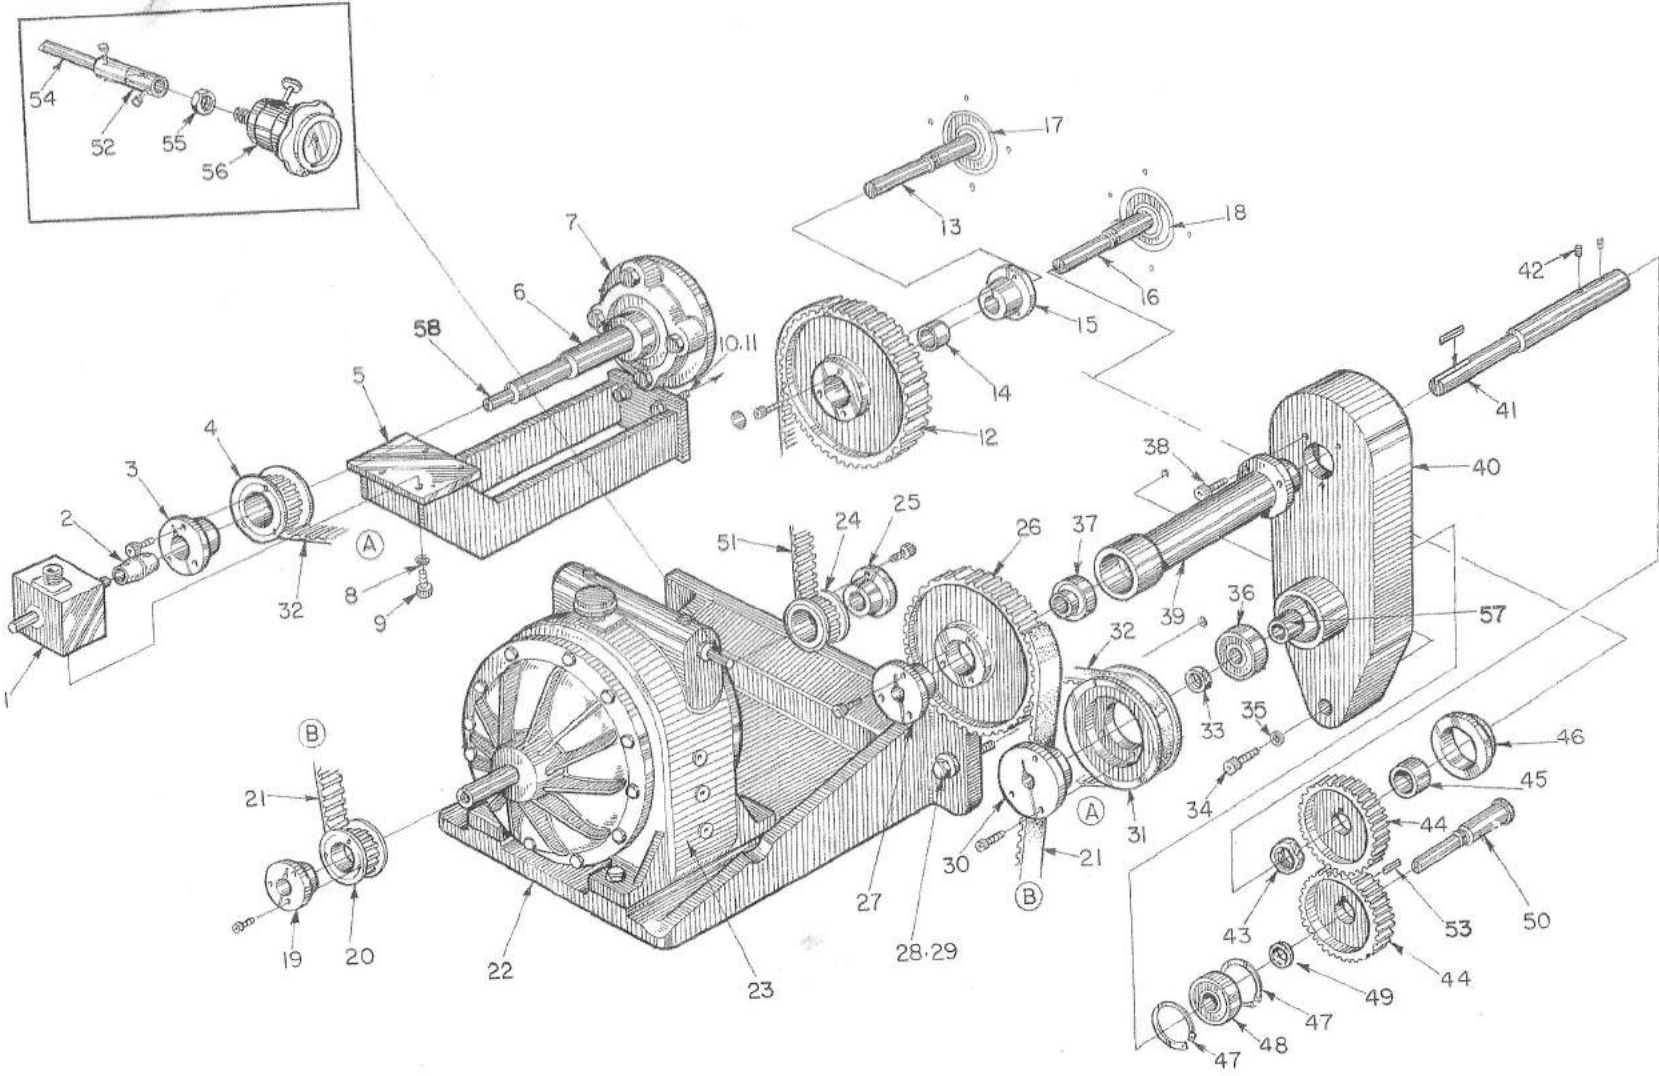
Drive Assembly LS - Nip Reversing Transmission
